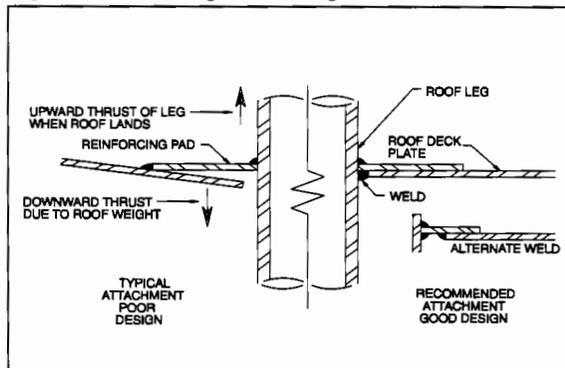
Welding of Roof Leg to Roof Deck Plate
